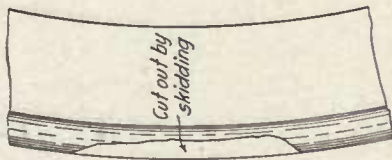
Steel Tire Cut by Skidding and Reclaimed by Oxy-Acetylene Welding.
